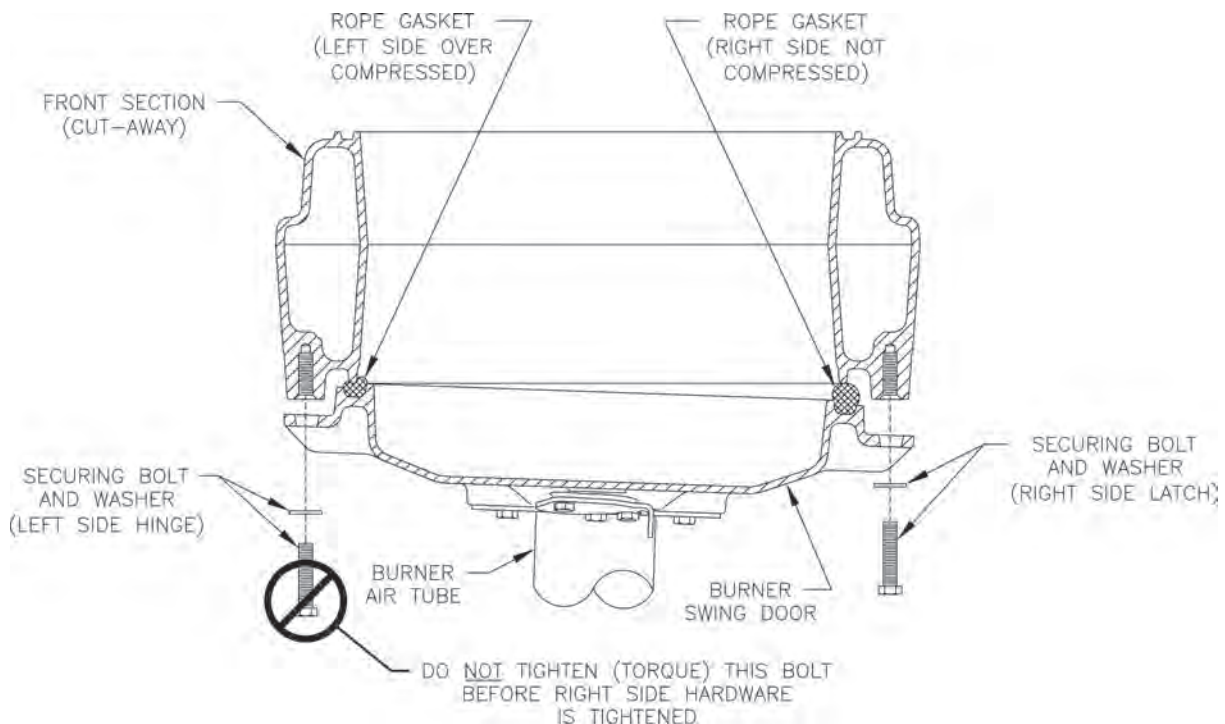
C: Top View - Burner Swing Door Fully Closed but Not Properly Secured or Sealed
